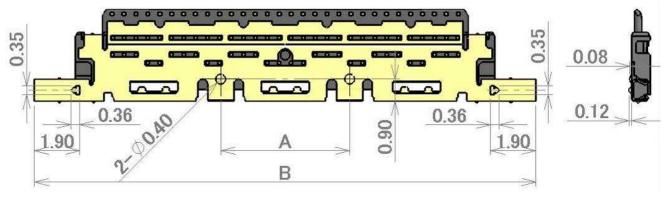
The SHELL bottom side of PLUG HSG ASS'Y
